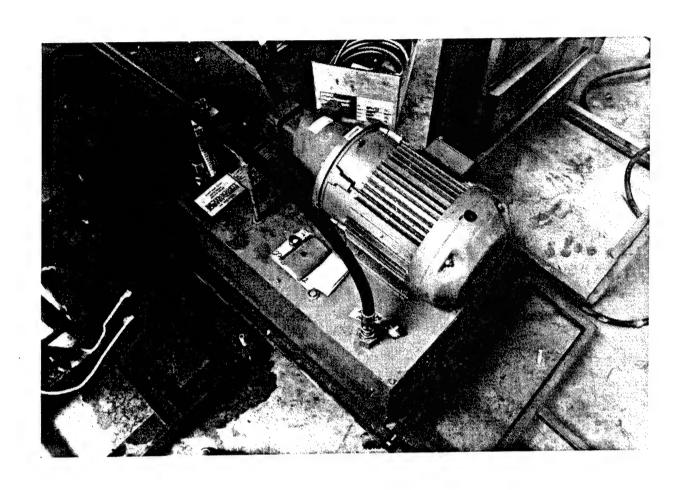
Hydraulic Power Unit Used to Power the TACOM Pin Insertion Assembly Apparatus
